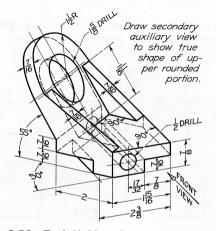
Tool Holder. Draw complete front view, and primary and secondary auxiliary views as indicated (Layout B-4).
